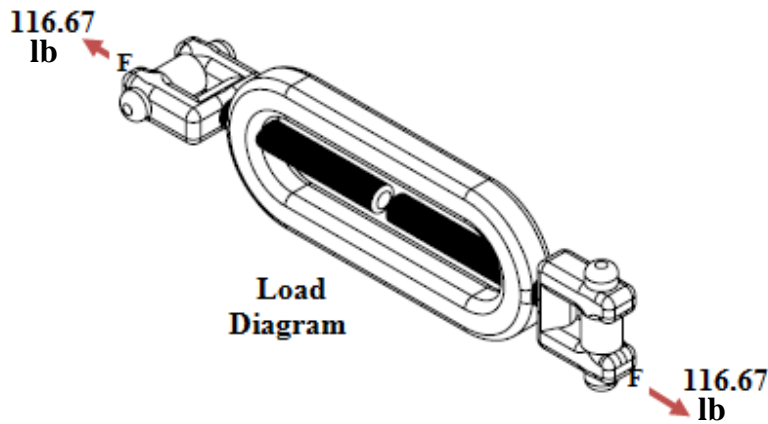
Basic design of the horizontal push rod and its loads (reciprocating turn buckle).
